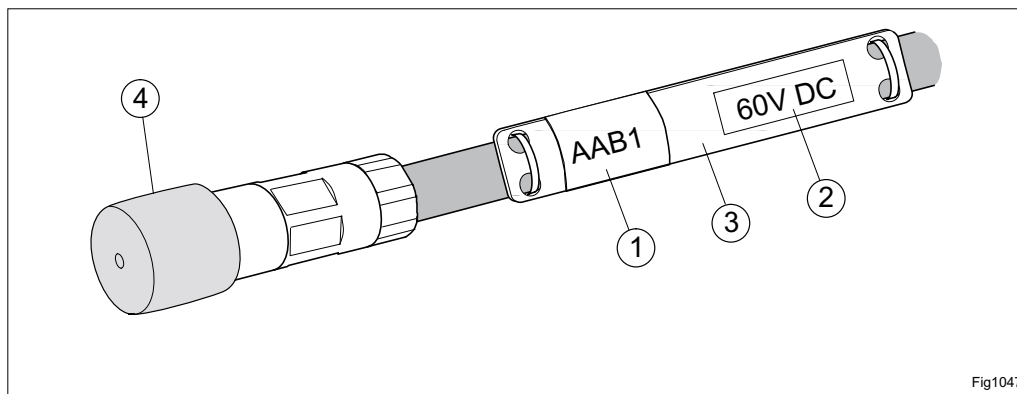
Assembling of radio cable cover and attaching of the label.
